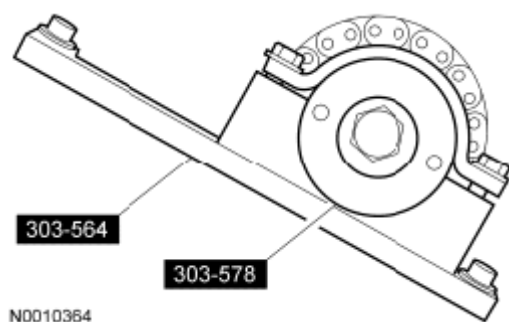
Identifying Camshaft Sprocket Holding Tool And Adapter
